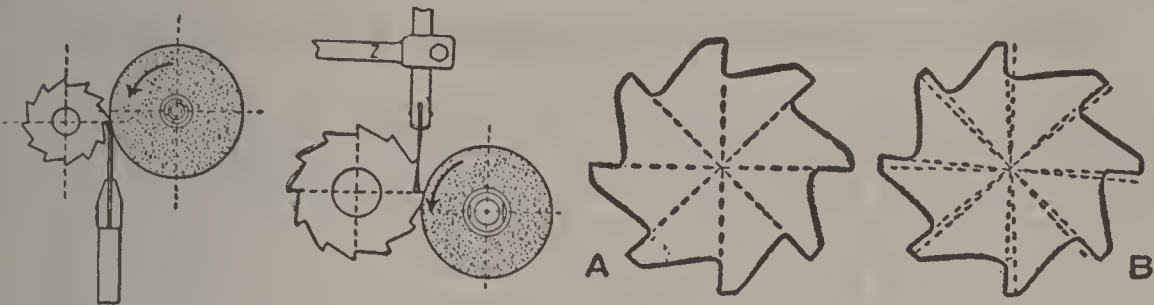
RELATIVE POSITIONS OF REAMER AND GRINDING WHEEL CENTERS
